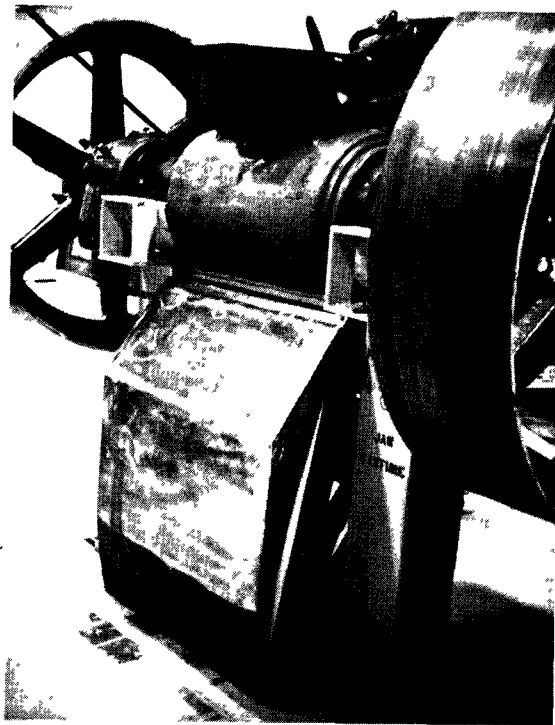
Secondary crusher Pitman assembly with modified wear plate and machined flat
